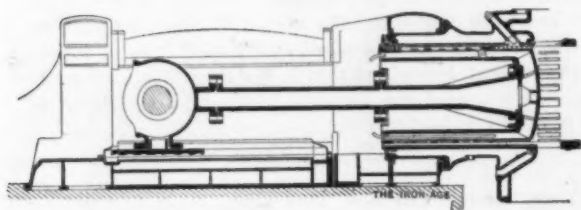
Oechelhaeuser Gas Engine.—Forward Working Piston.
